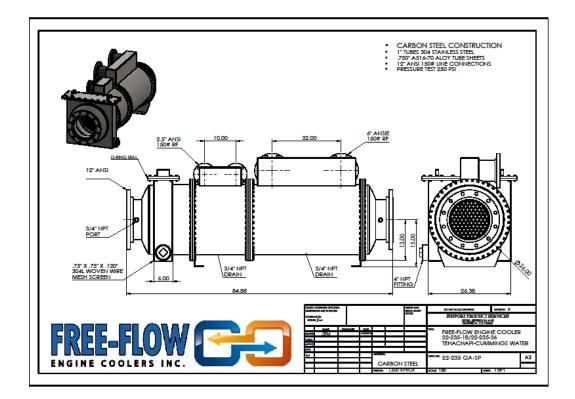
HEAT EXCHANGER WITH FILTER BOX FABRICATION DRAWING
